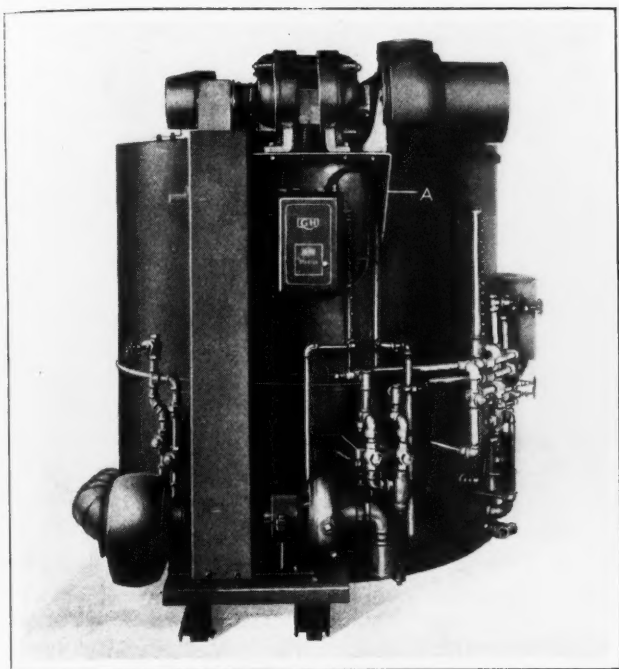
Control Side of Washing Machine, Assembled by Arc Welding
